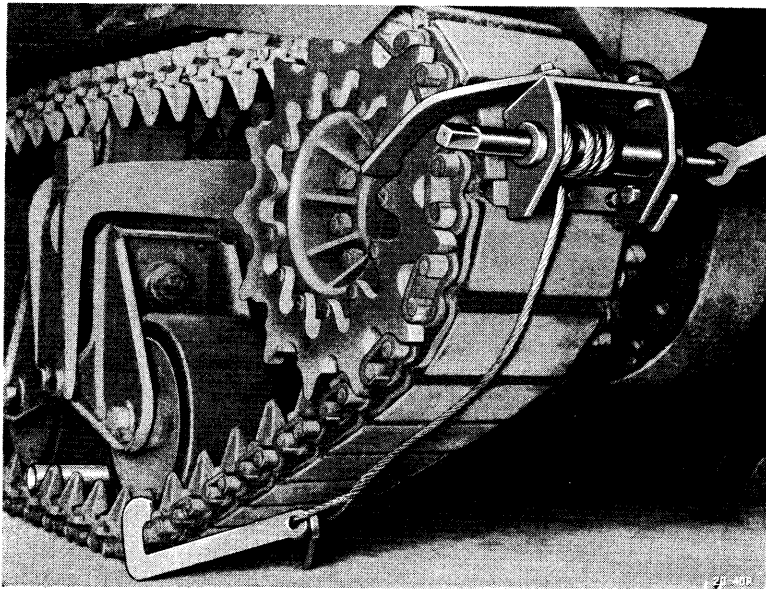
Track Strainer for rubber tracks with blocking tube No. 1-11033 in position. Block tube tool shown in position immediately in front of second bogie wheel
